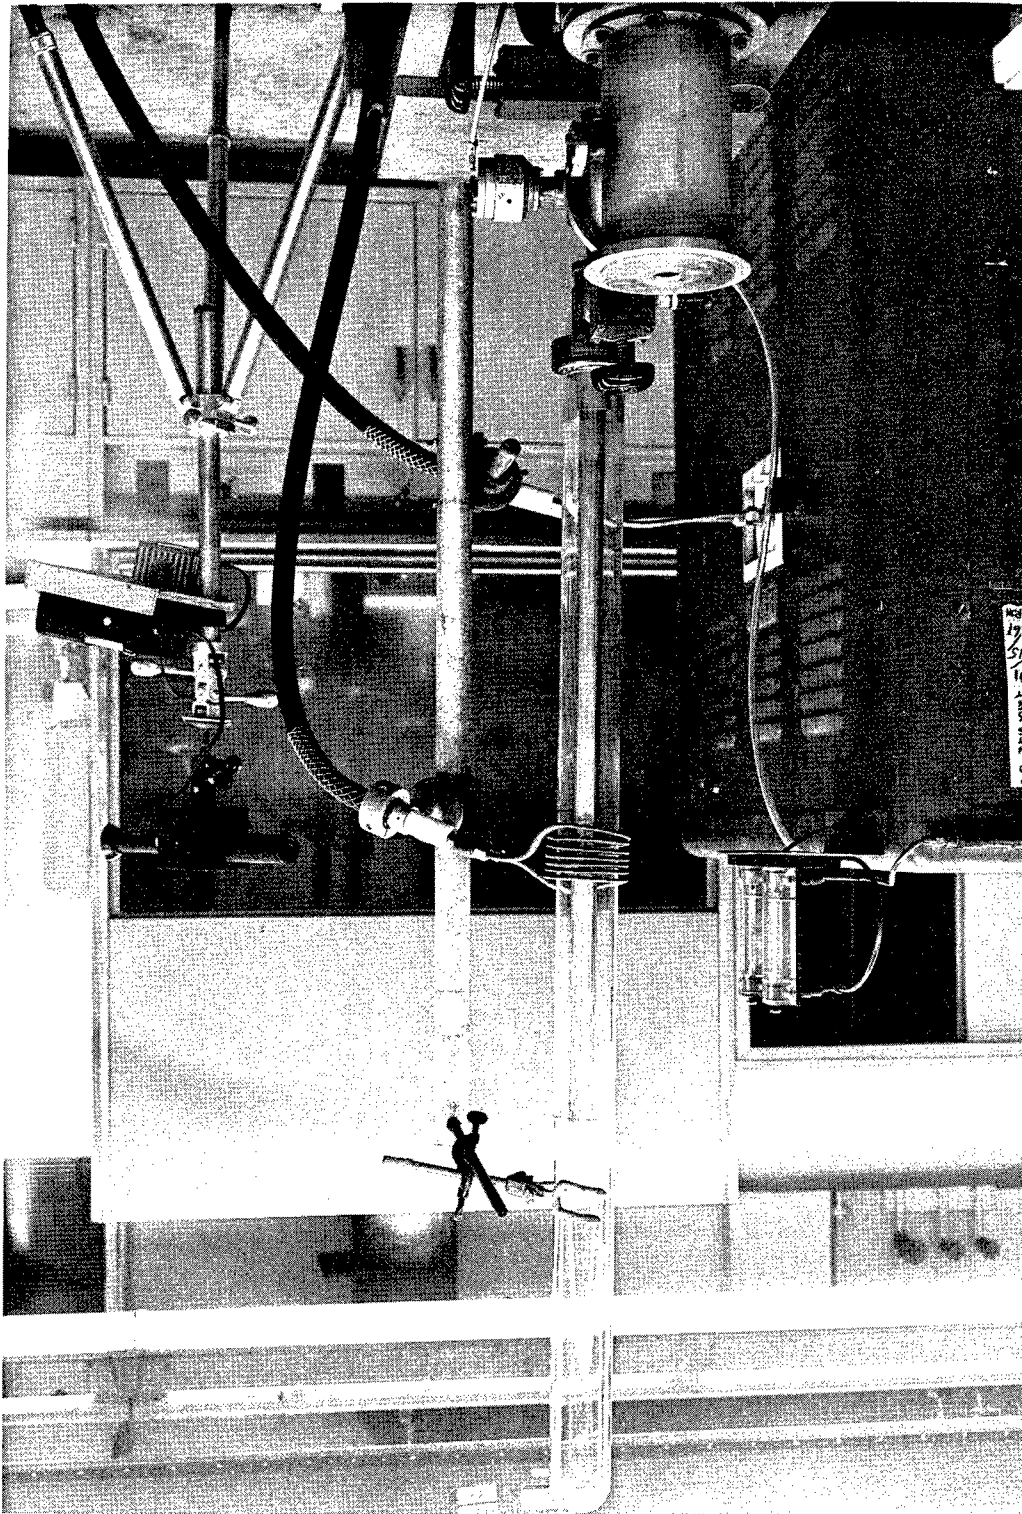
VACUUM INDUCTION BRAZING SETUP FOR 36-INCH HEAT RECEIVER TUBES
